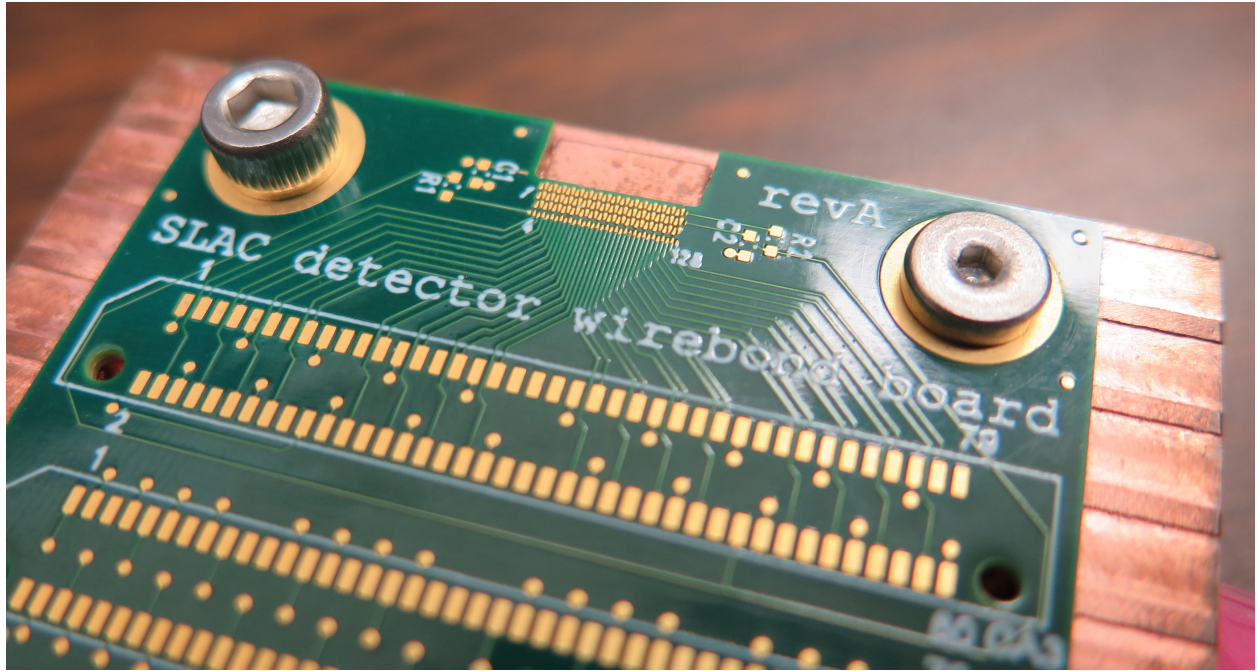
Shows breakout board bond pads. 128 anode + HV and HVReturn will be bonded using a bonding wire. The pitch of the PCB bonding area is approximately 4 mils. Designed by Matt Andrew [12]
